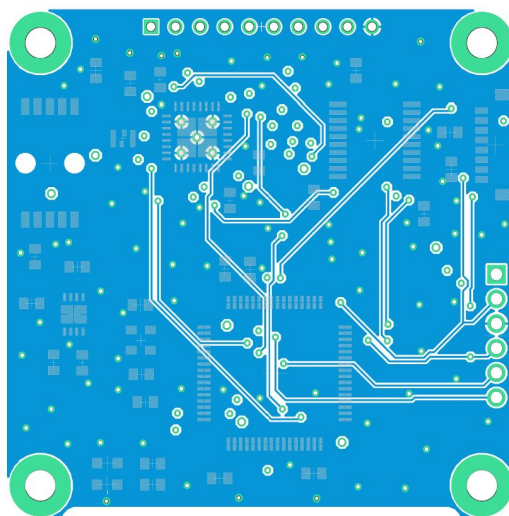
Bottom layer of the radiation payload PCB prototype
